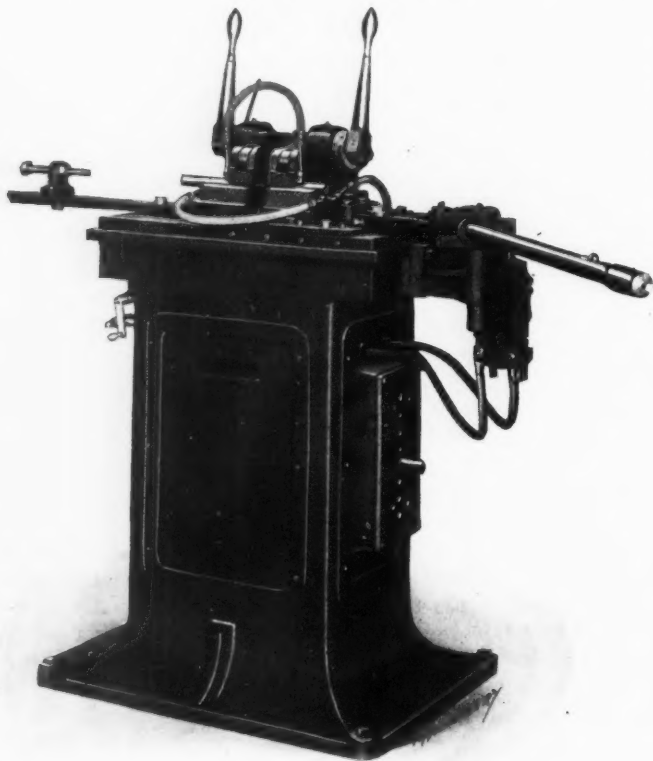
Detroit Type P Electric Butt Welding Machine
